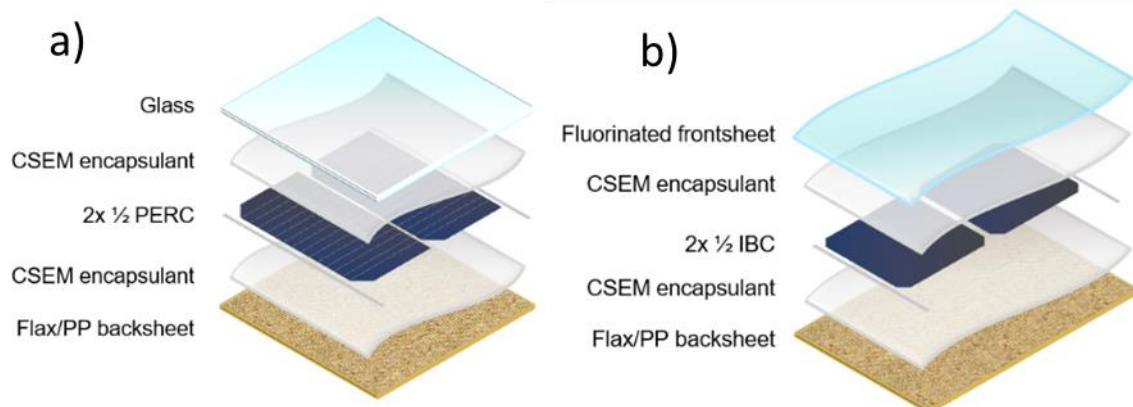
Schematic BoM of a) glass/backsheet modules with flax backsheet b) lightweight module with fluorinated frontsheet and flax backsheet
